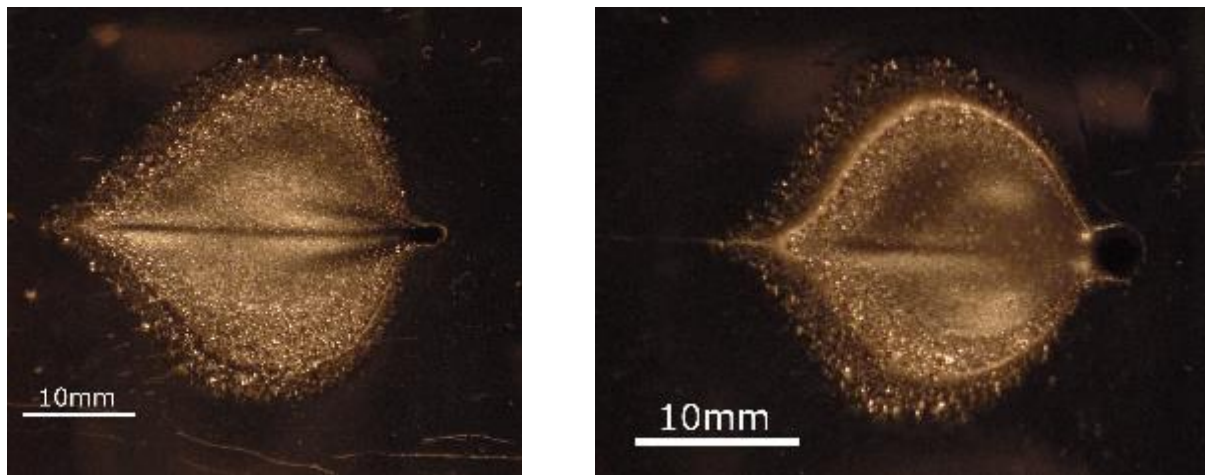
Typical 'leaf print' evaporation patterns taken from below the cutting zone. a. Print taken 30mm below the cutting zone when cutting 6mm stainless steel at 0.72m/min. b. Print taken 30mm below the cutting zone when cutting 3mm stainless steel at 2.57m/min. (laser power 1850W, cutting gas pressure 13 bar for 6mm and laser power 1780W, cutting gas pressure 10 bar for 3mm)
